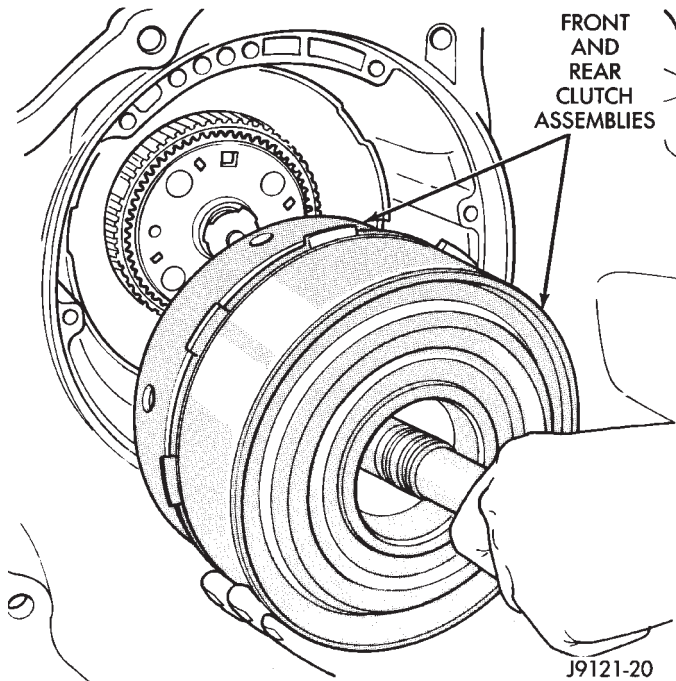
Installing Front/Rear Clutch Assemblies—46RH
